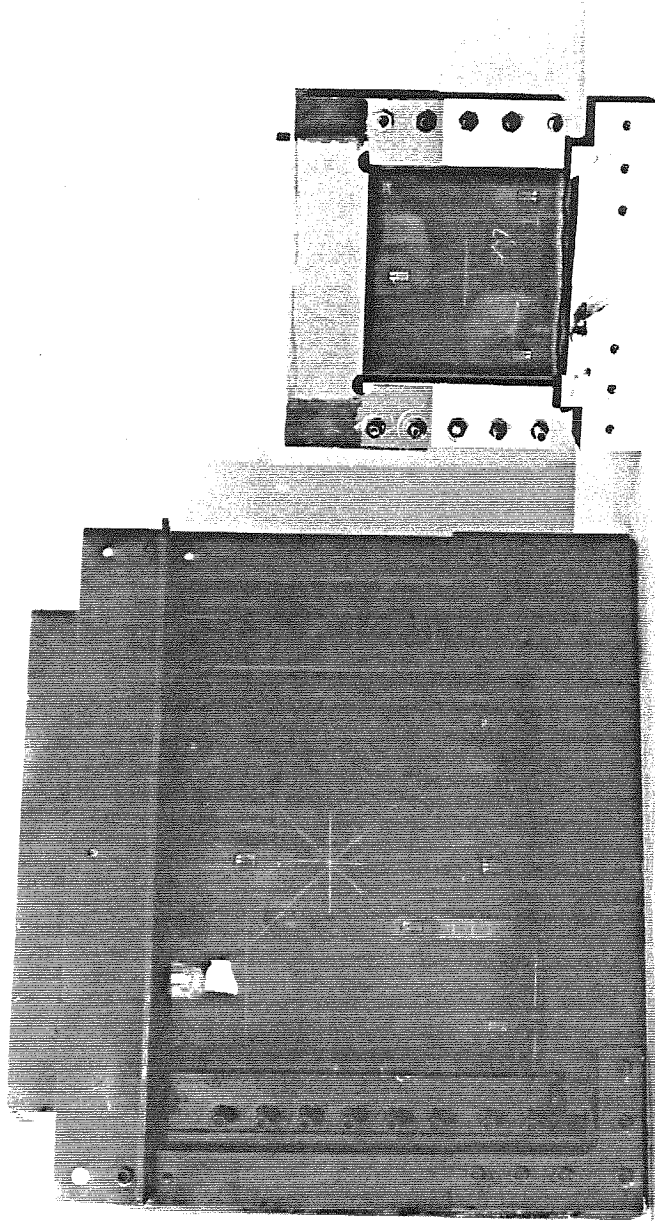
LARGE AND SMALL TEST FIXTURES - IMPACT FACE
